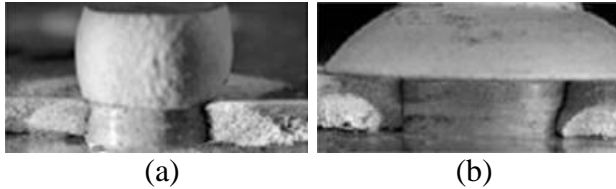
View of fatigue cracks located in the rivet area at the initial stage of growth
